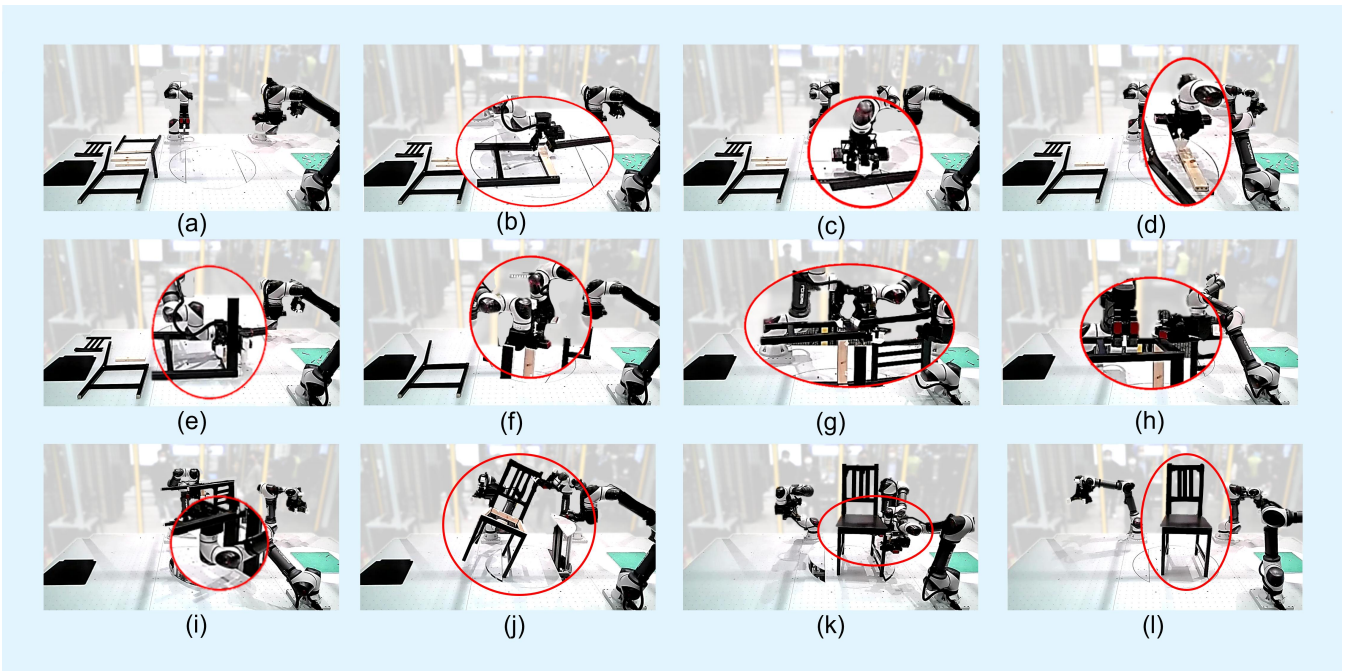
Assembly process. (a) Initial state. (b) Move base part to the assembly workspace. (c) Wooden pin assembly. (d) Bracket assembly. (e) Frame assembly. (f) Wooden pin assembly. (g) Frame assembly. (h) Upper screw bolt assembly. (i) Lower crew bolt assembly. (j) Erect chair. (k) Fit seat frame. (l) Assembly is complete.
